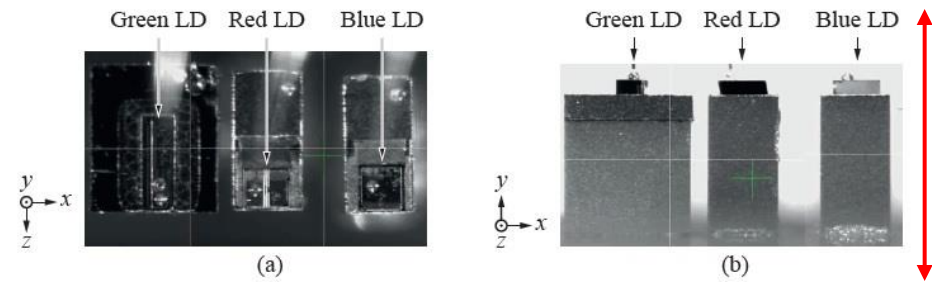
(a) Top and (b) front view of the laser diode subassemblies.
